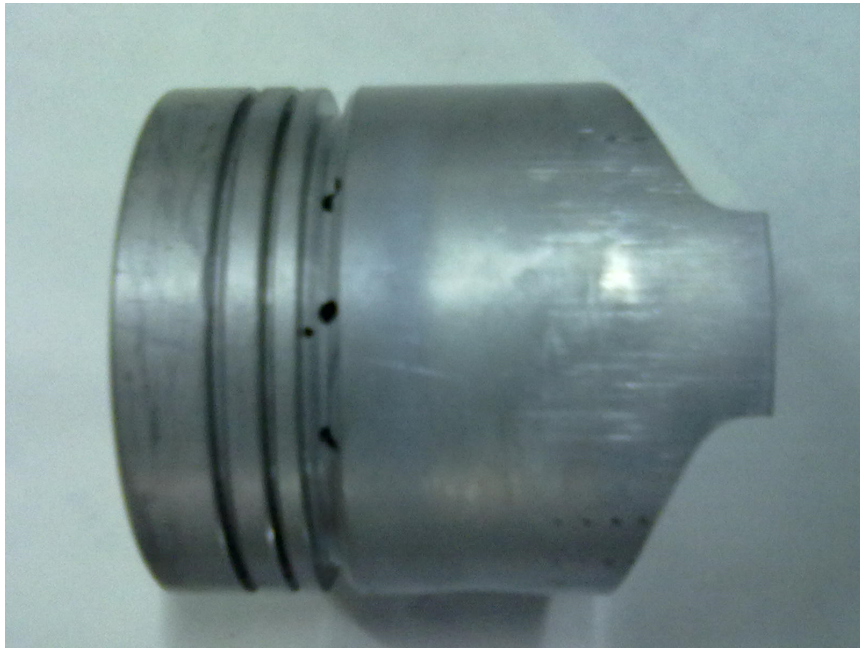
Dimension of CNG converted Piston (CR=12)
